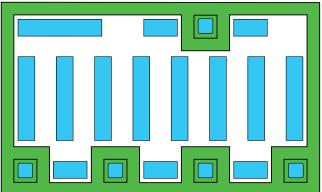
Solder Mask Superposed on Solder Stencil. (top view)
